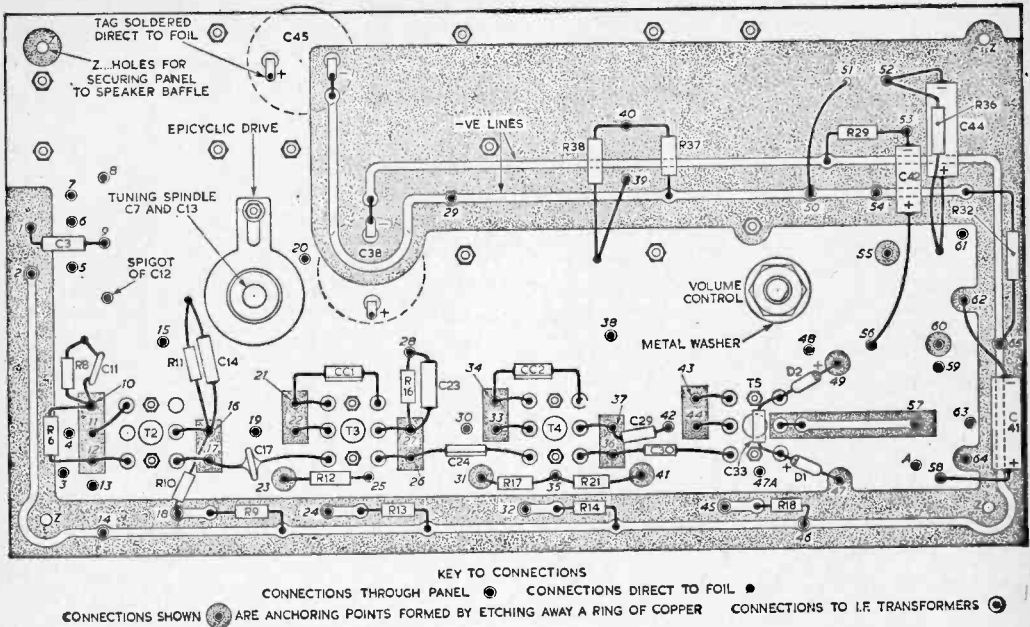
The below-chassis wiring—this diagram should also be used to mark out the printed wiring before etching; the copper which remains after etching is shown unshaded.
